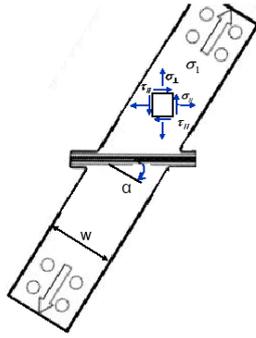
Example of weld with inclined principal stress direction
